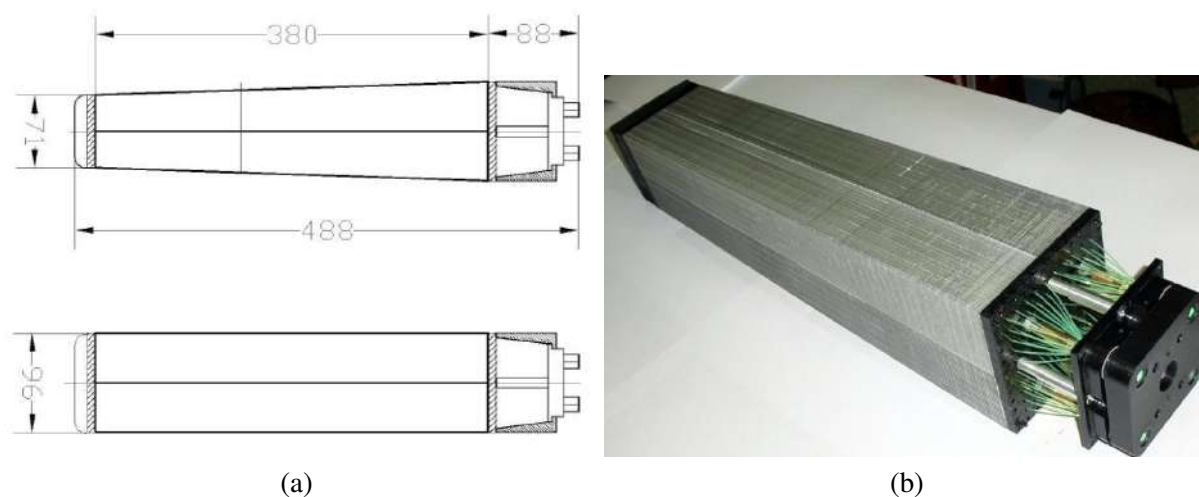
ECAL module drawing (a) and photo (b) without light shielding cover.
